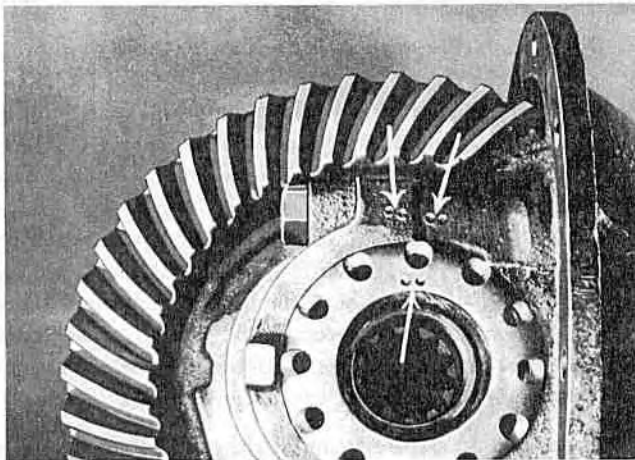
The Differential Bearing Caps and Adjusting Nuts in Proper Position
